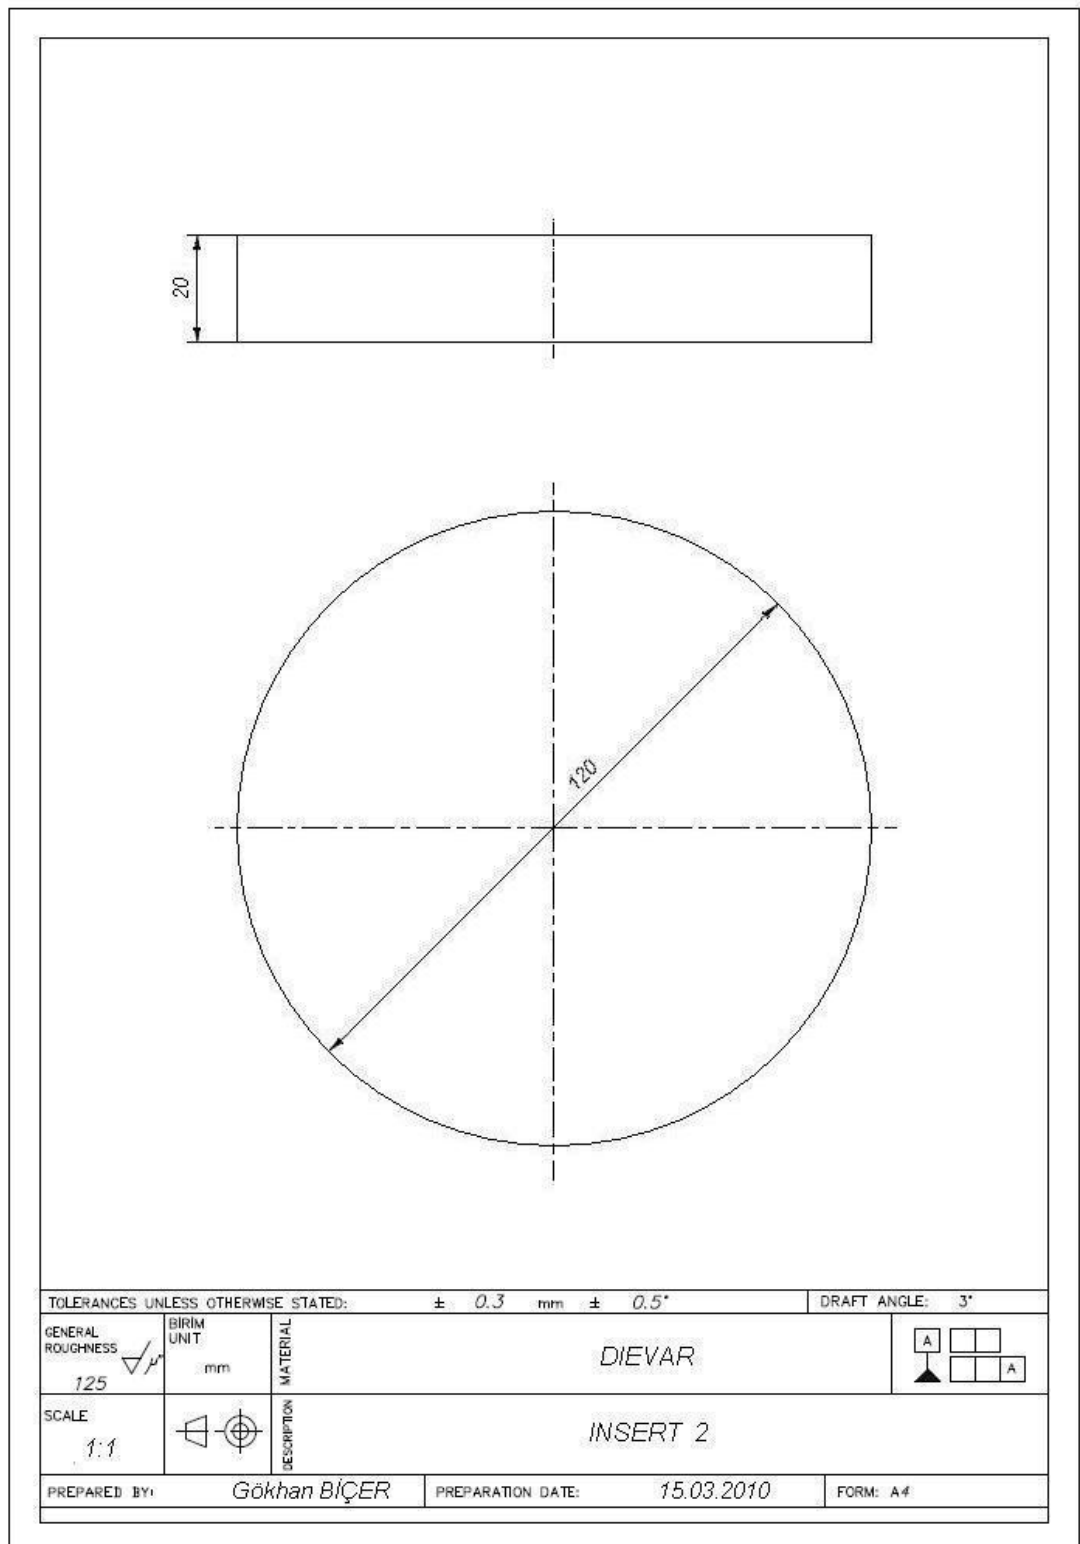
Technical Drawing of the Insert with 20 mm Height
